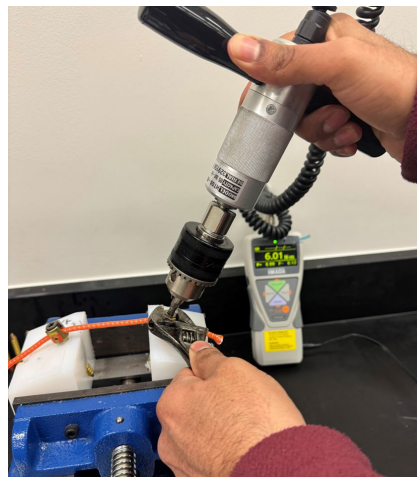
Test blocks held in vise and setscrews being inserted to lock tether cord into the screw head using a handheld torque measuring system
